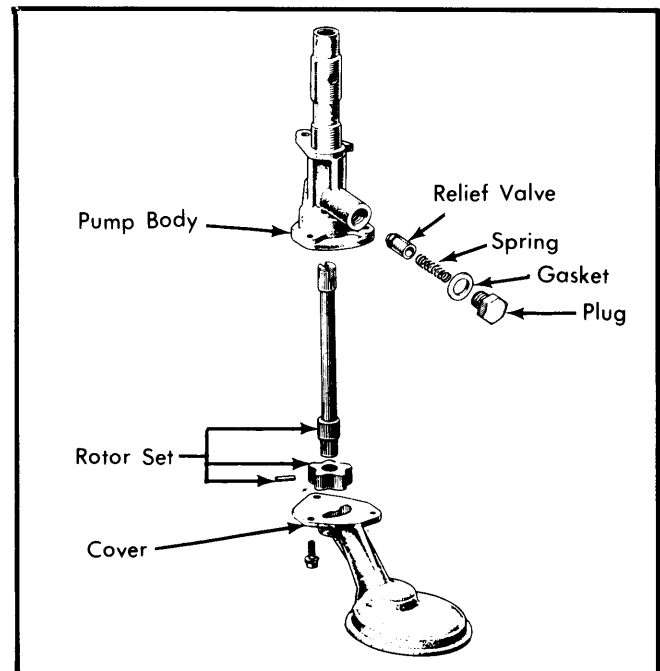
Exploded View of Oil Pump and Pressure Relief Valve Assembly
